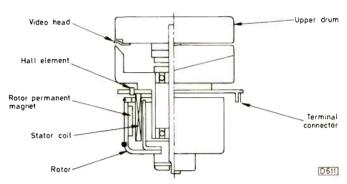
Construction of the HR7200/3V29 drum motor. The drive transistors shown in Fig. 4 are mounted on a separate motor drive amplifier board.
